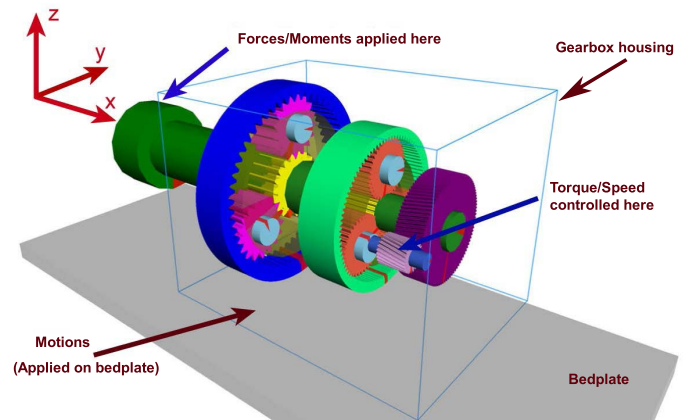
MBS MODEL OF 5-MW REF. GEARBOX [8].
